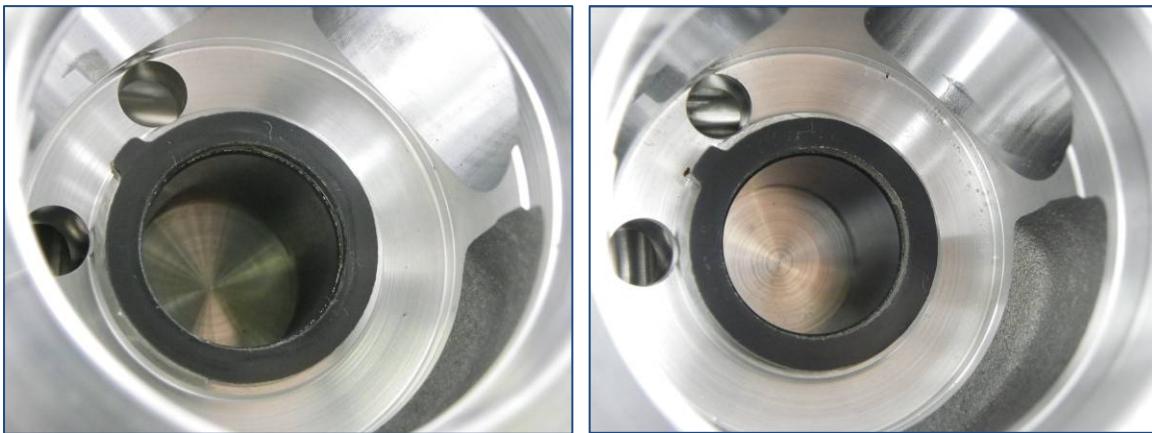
AF-8029 JP-8 (HT Left), Rear Pump Body Camshaft Bushing, JP-8 (Base Right)
